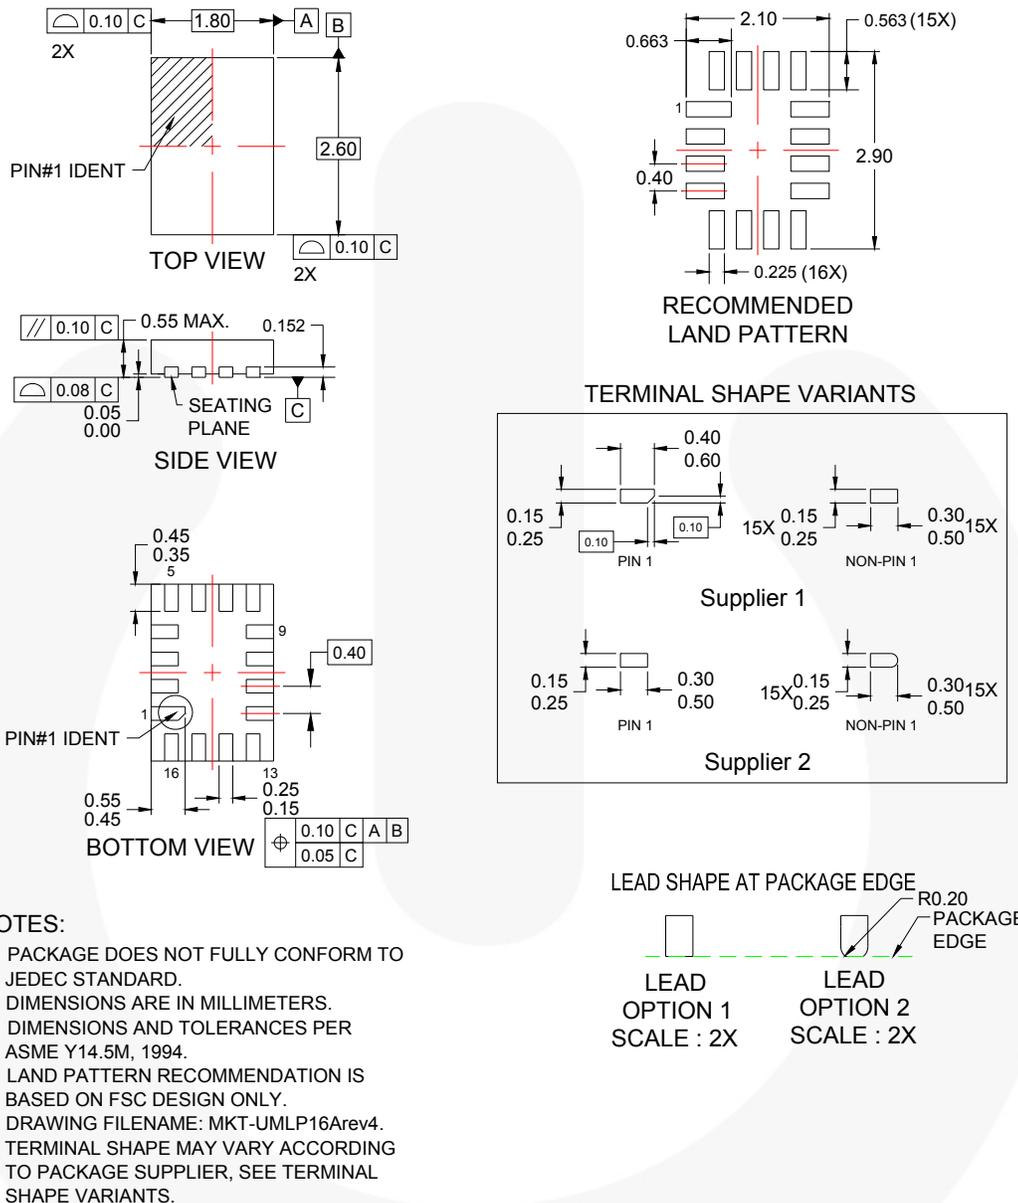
16-Pin Ultrathin Molded Leadless Package (UMLP)
